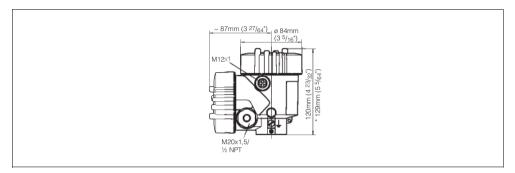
Aluminium double chamber housing (with integrated indicating and adjustment module the housing is 9 mm/0.35 in higher)
